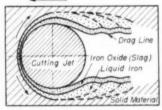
Molten Material Formed in the Cut Is Rejected to Rear Where It Forms Drops Which Rapidly Solidify
